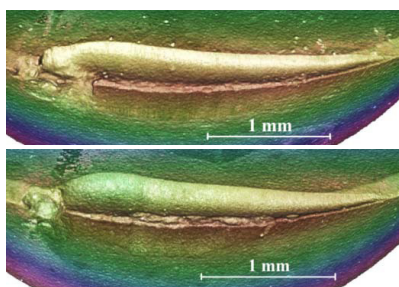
3-D view of the worn (a) BCBN and (b) CBN500 tools.
